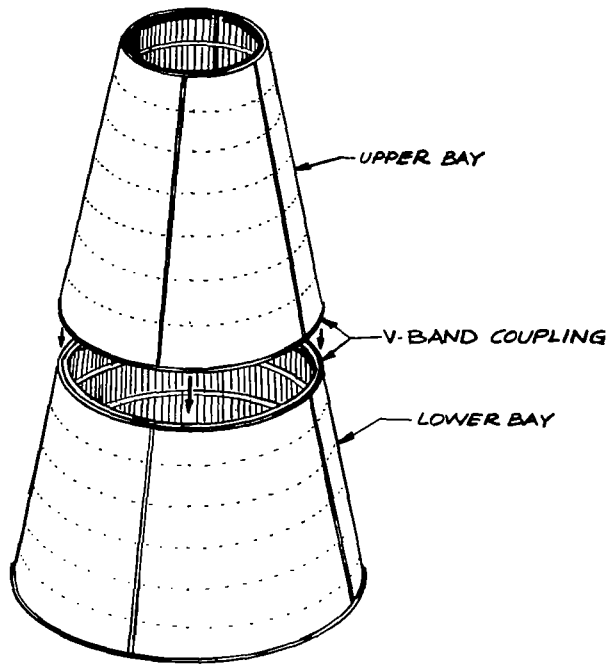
Mating of Upper and Lower Bays (Step 7)
